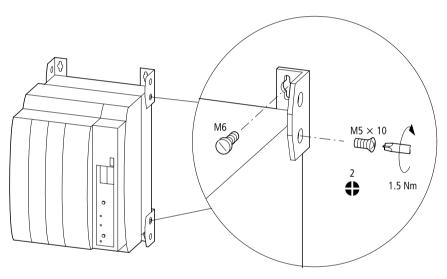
Fixing to the mounting plate (DF4-341-15K to 30K)
